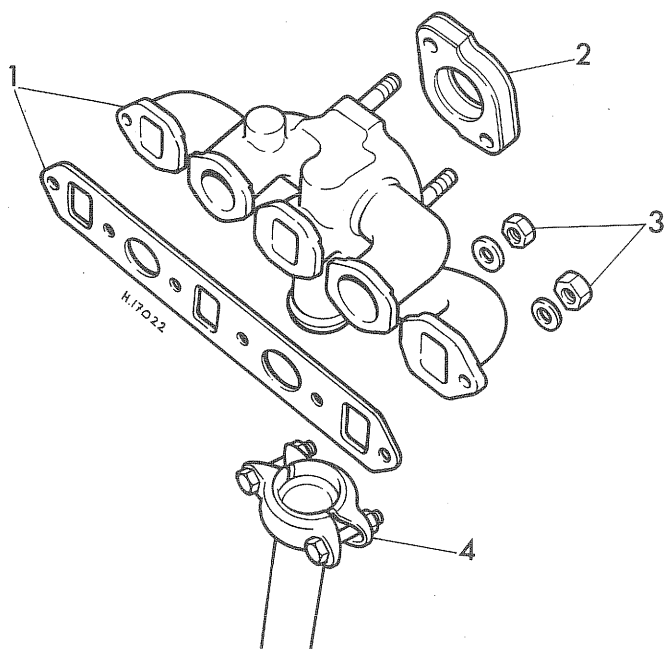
Inlet and exhaust manifold assembly (Sec 20)
